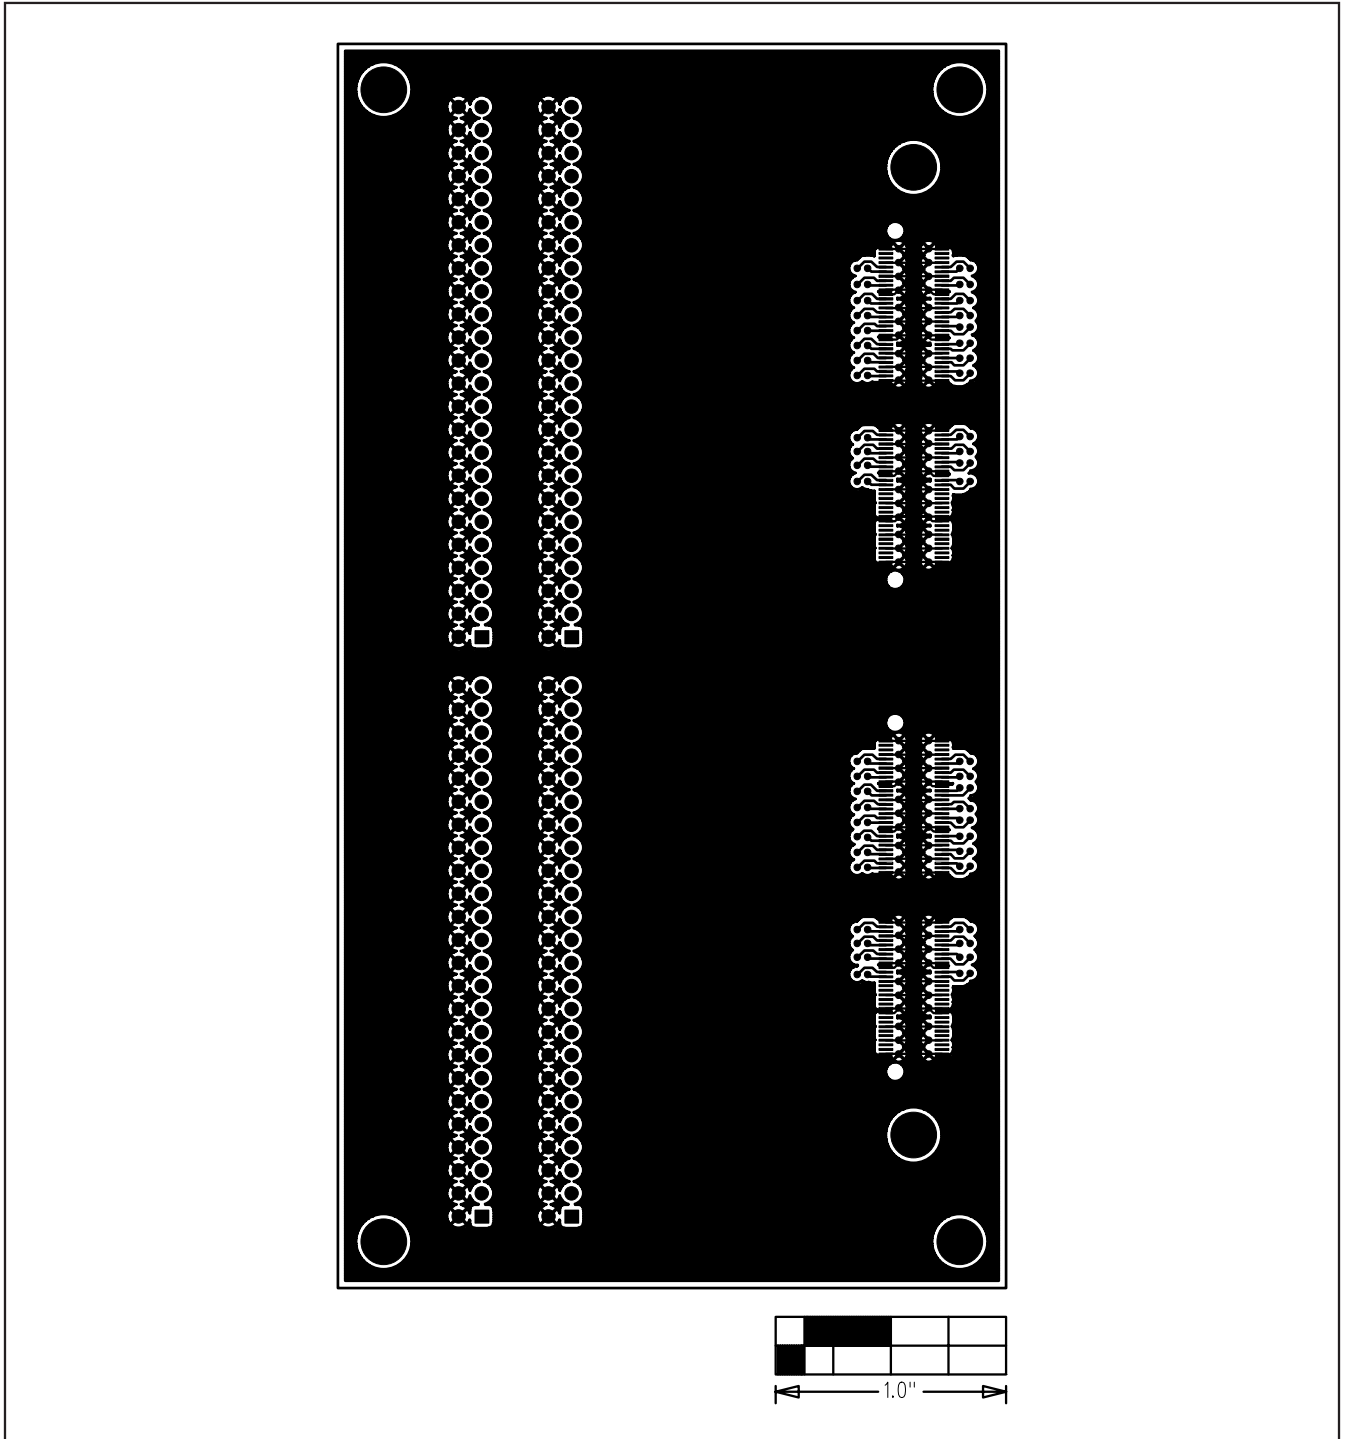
12-Bit LVDS Adapter Board Layout—Component Side
